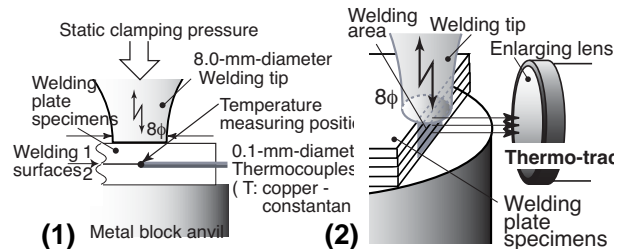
Measurements of temperature rises at welding parts using (1) thermocouples inserted between welding surfaces and (2) a thermo-tracer.
